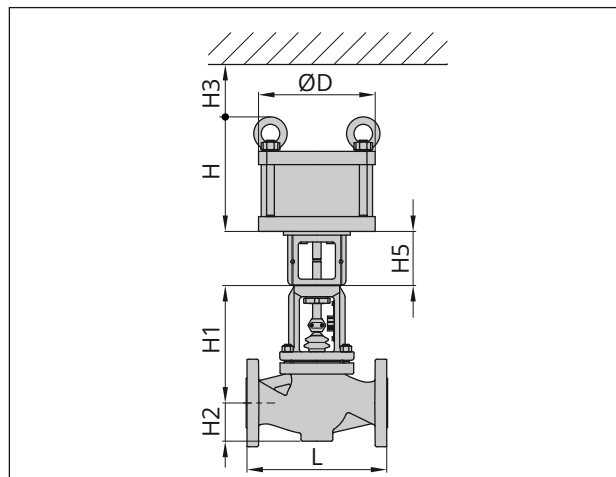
Type 3241-9 PSA, up to nominal size DN 150/NPS 6, with Type 3275A Pneumatic Piston Actuator (314/380/490 cm²)
